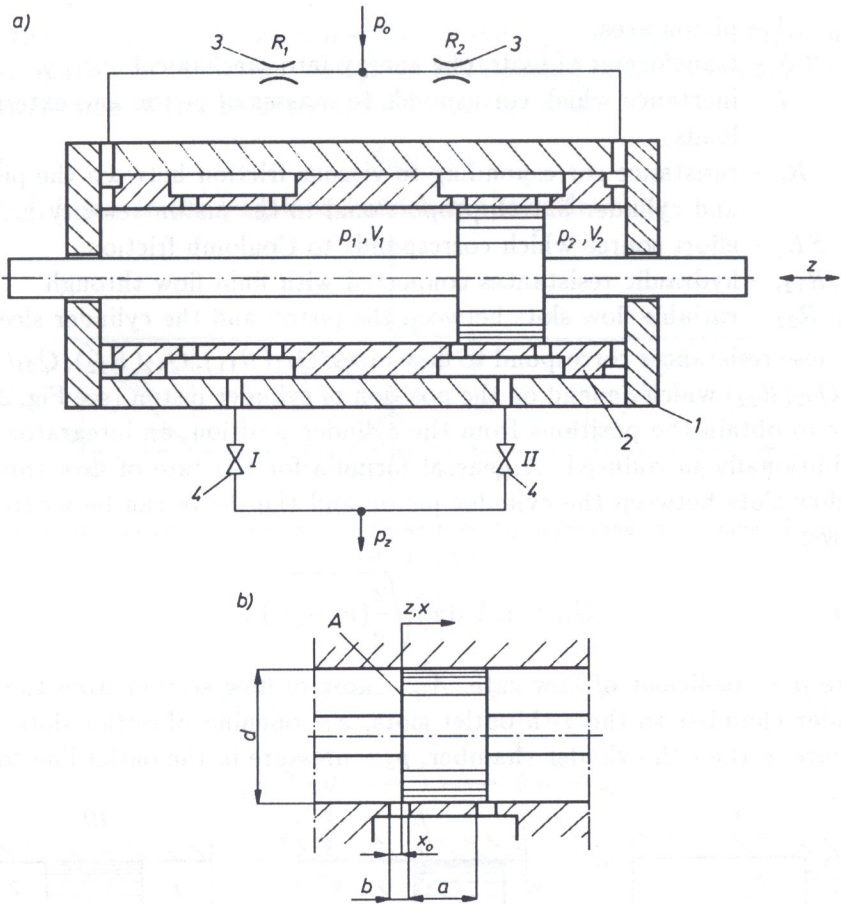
Hydraulic positional cylinder: a) diagram, b) metering edges, 1 - cylinder, 2 - sleeve, 3 - throttle valves, 4 - control shutoff valves.
